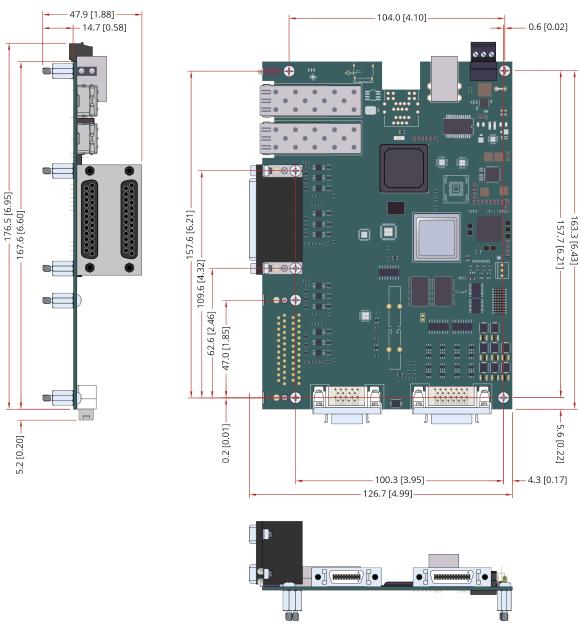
Dimensions [-2P2 (OEM 2-Axis)]
